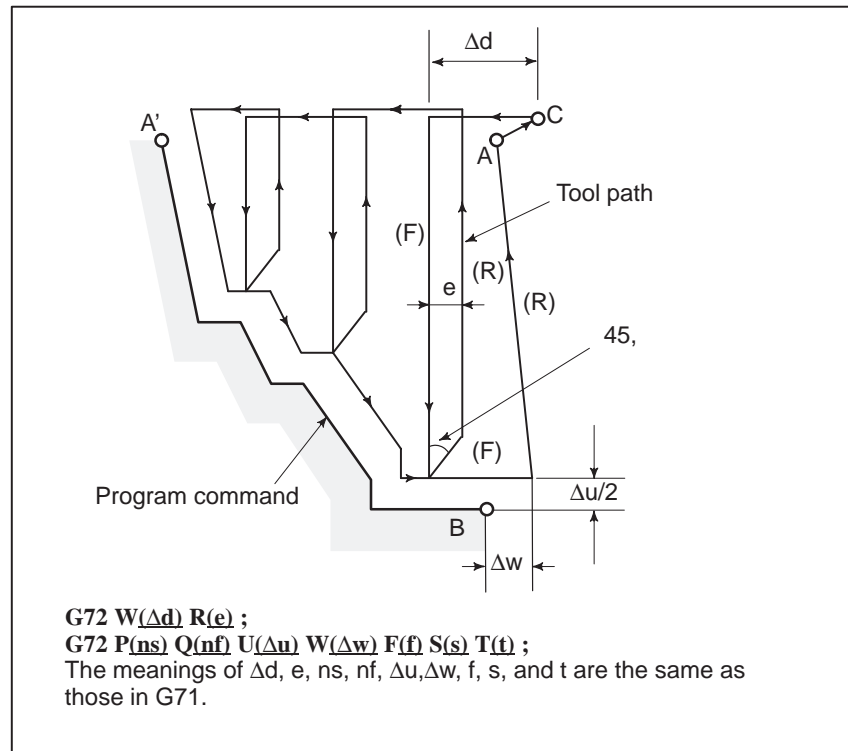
(a) Cutting Path in Stock Removal in Facing
